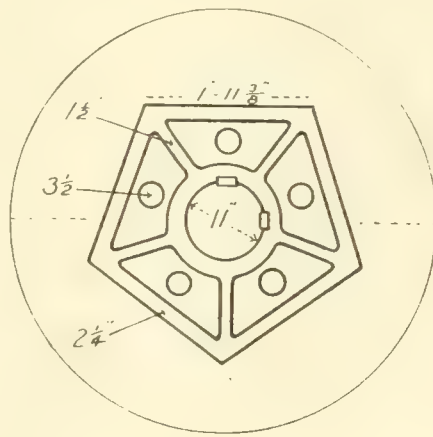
EARLY DESIGN OF BOTTOM TUMBLER.
